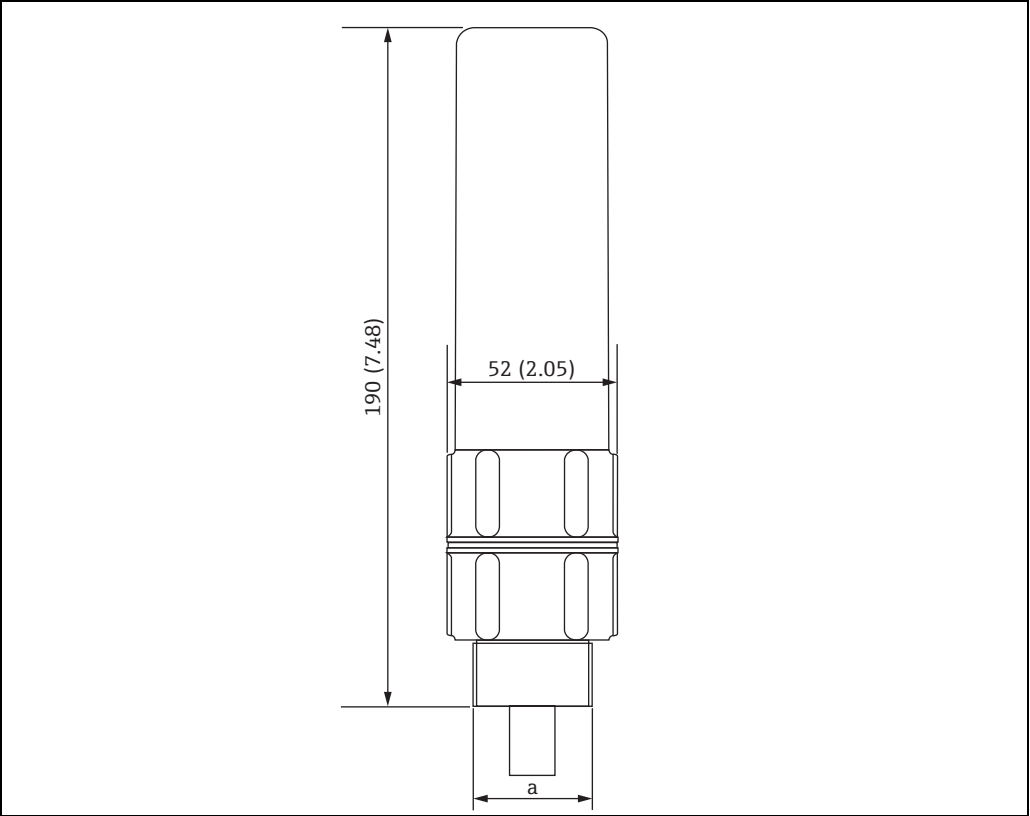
Top anchor dimensions, Unit of measurement: mm (in)
